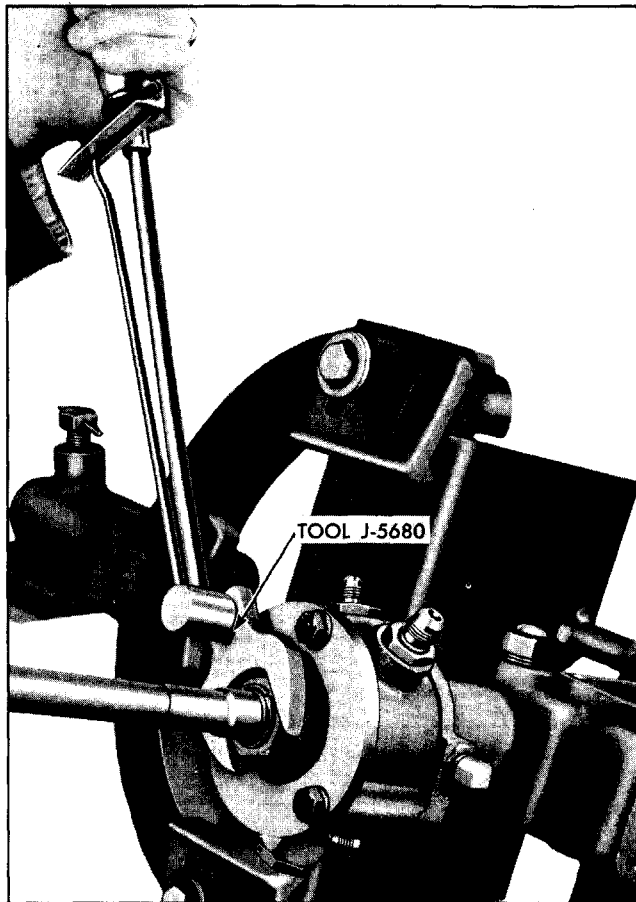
Adjusting Thrust Bearing Nut Using Tool J-5680
